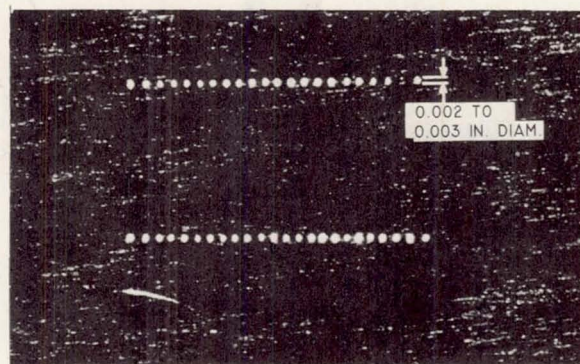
Electron-beam-drilled holes in 0.010-inch molybdenum. (Courtesy Hamilton Standard Div., United Aircraft Corp.)
